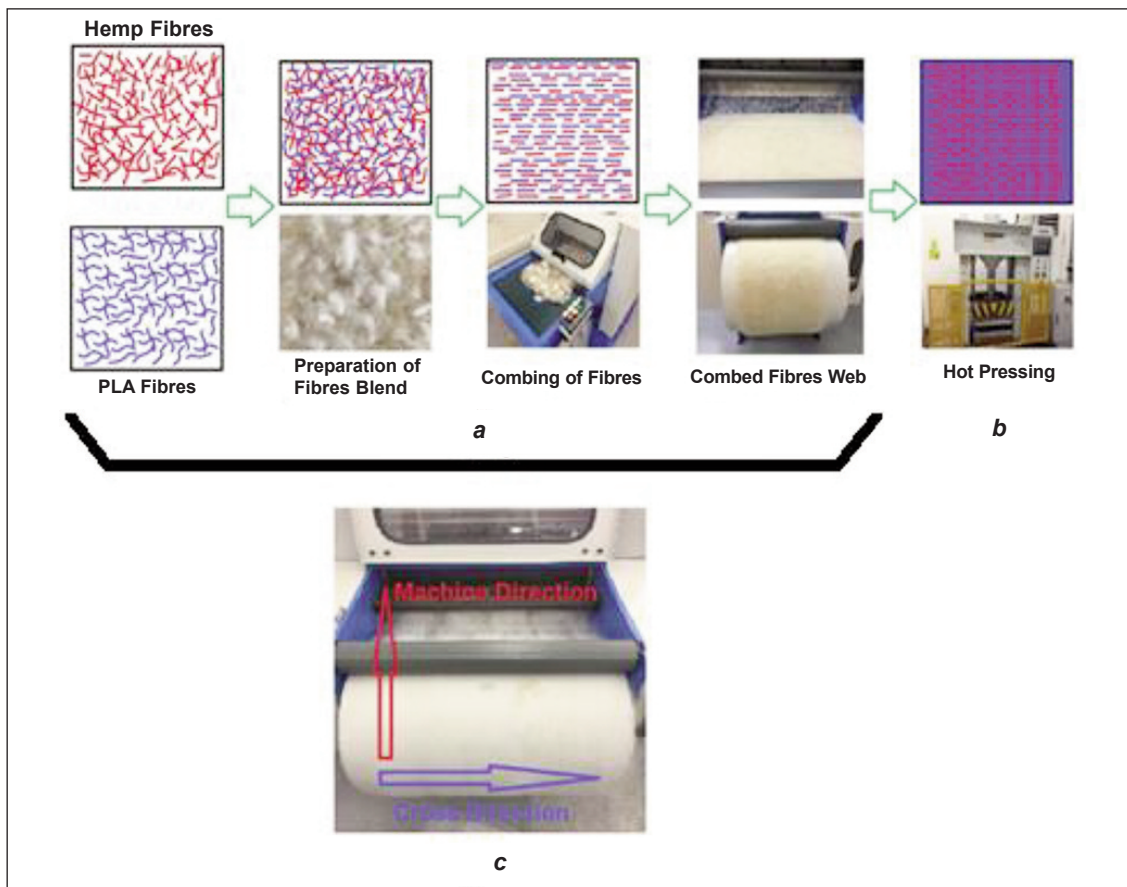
Schematic drawing of the process: *a* – fibre blend; *b* – pressing process; *c* – machine views of the carding
